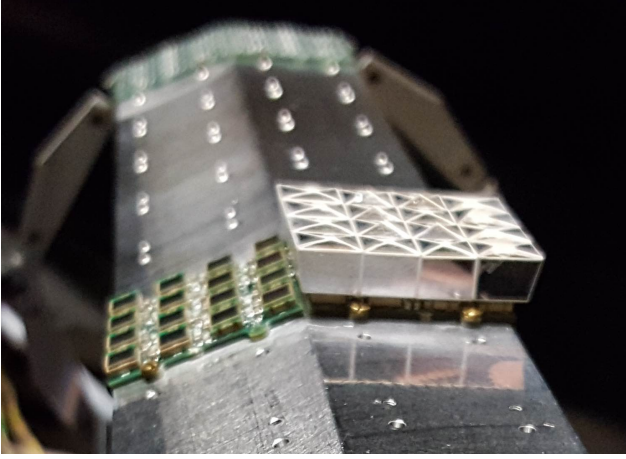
First half-assembled sub-module mounted on the cooling structure.
